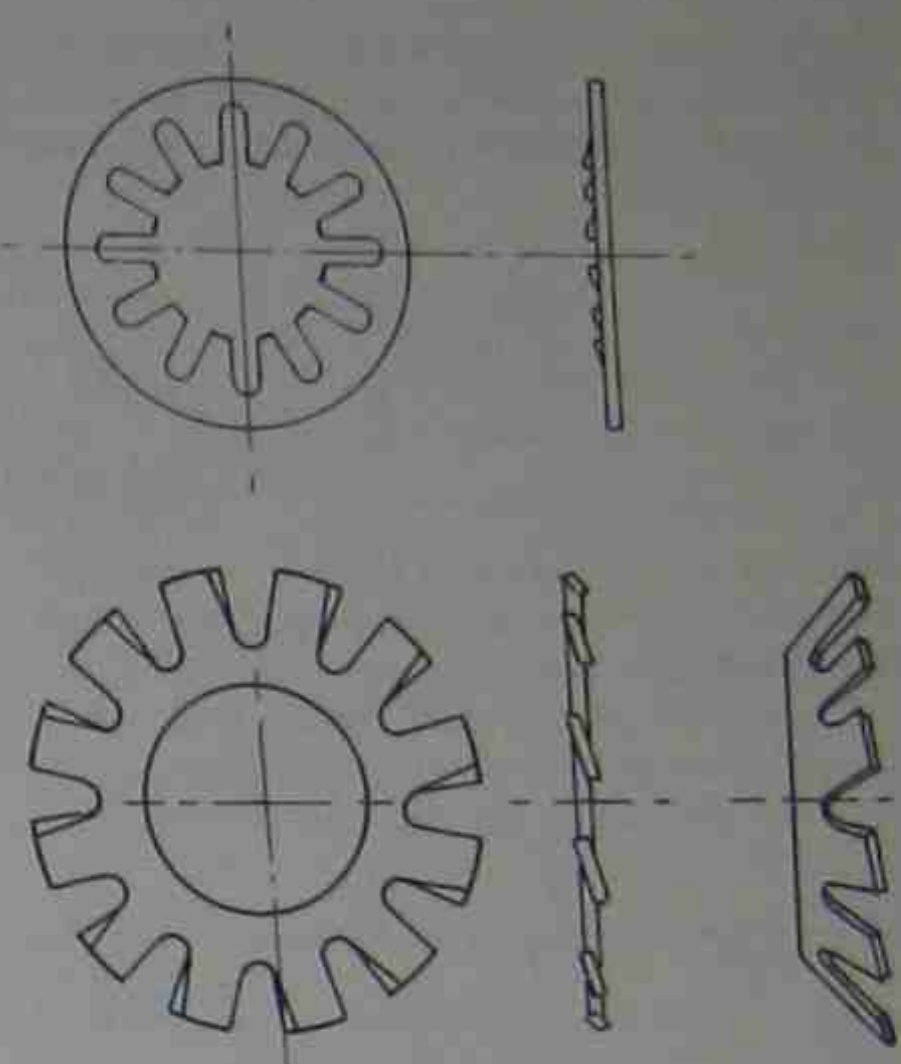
Internally serrated lock washer (tooth lock washer) and externally serrated lock washer, flat and for countersunk hole
